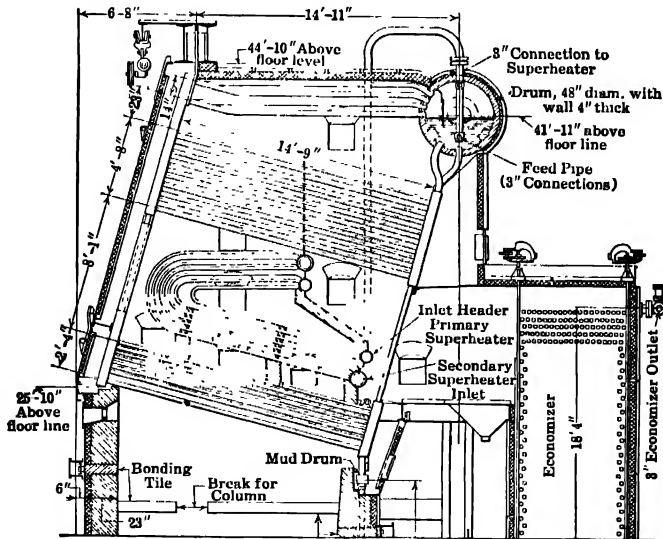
1200 lb. B. & W. Cross-drum Boiler.
